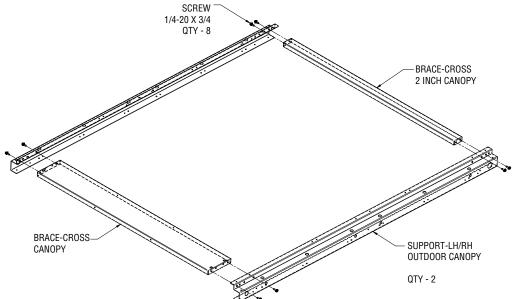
Top View of Canopy Frame Assembly (Kiosk Canopy Frame Assembly is similar.)
